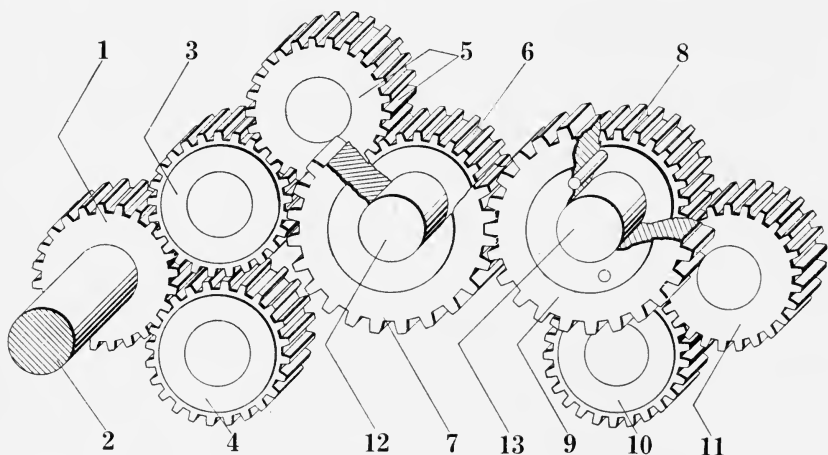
Distributor Screw Gear Assembly for the Mixer Machine. The distributor clutch shaft is represented at 2. Upon this shaft 2 is fastened a driving gear 1; 3 and 4 are the front distributor upper and lower gears respectively which are fastened to the ends of the conveyor screws. These gears are driven by the gear 1 upon the clutch shaft 2, but do not mesh with each other. Meshing with the front distributor upper front gear is an idle gear 5 which transmits motion to the middle distributor screw gear 6. As has been previously explained, the middle conveyor screw on the Mixer machine serves as the back conveyor screw for the front distributor, and at the same time it forms the front conveyor screw for the back distributor.
